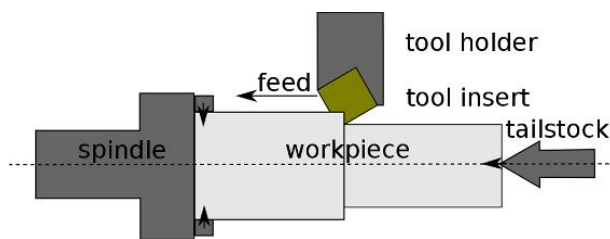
Simplified model of the workpiece and the lathe (not to scale) showing the workpiece from the tangential direction, showing the workpiece clamped to the spindle and supported by an (optional) tailstock and being cut by a tool insert (replaceable part, partially obscured by yet uncut workpiece) attached to a tool holder. In this drawing, the feed direction is to the left.
